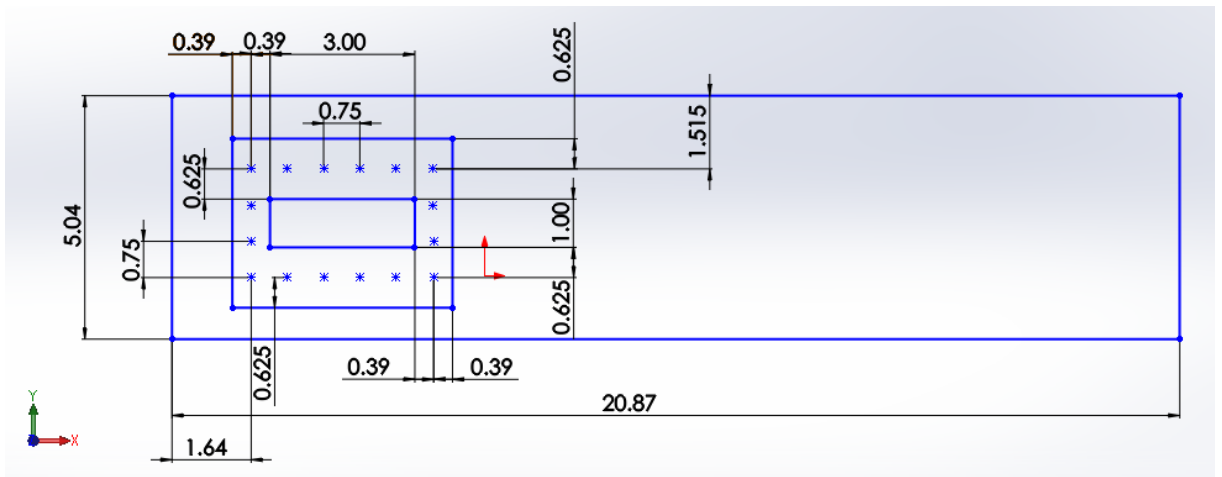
Dimensions of New Repair Design (3" x 1")
